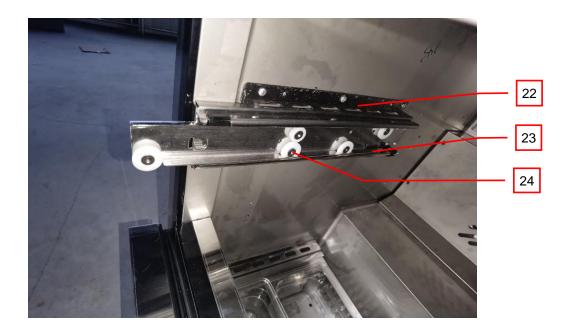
Drawer door part view - TUC29R-2D (TSSP29(M)-2D has the same drawer construction)
